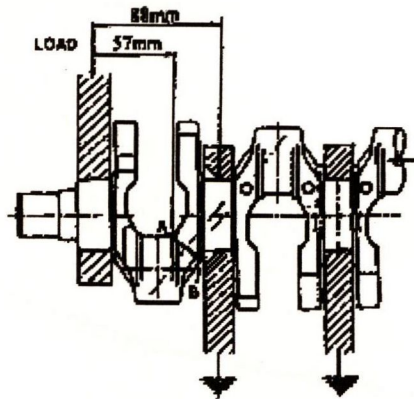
The method of clamping and loading. The clamp on the left is loaded downwards to produce bending or rotated to produce torsion.
